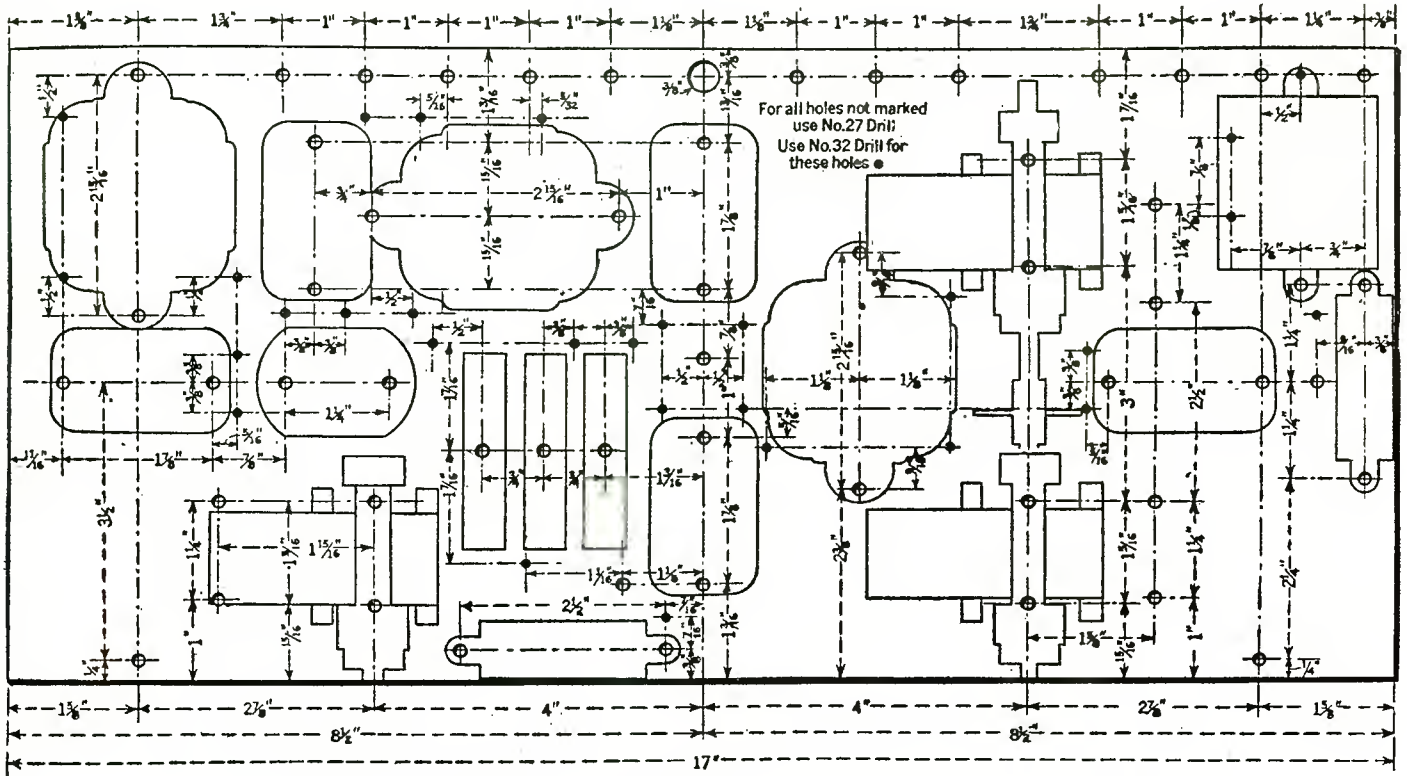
Sub-panel layout, with dimensions given for drilling mounting holes for all component parts.
